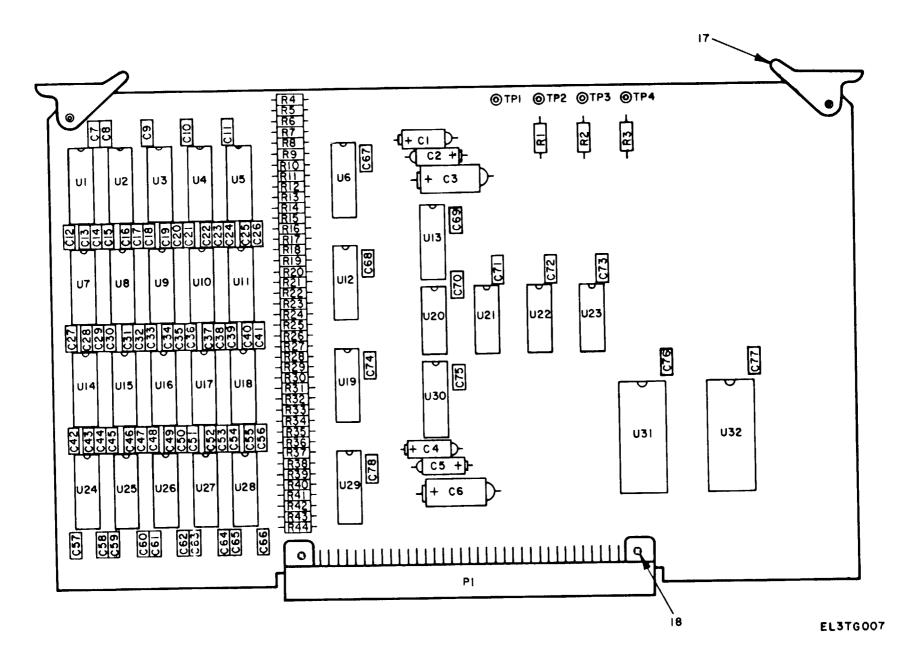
Circuit Card Assembly, Memory (3A1A2) (Sheet 1 of 2)
